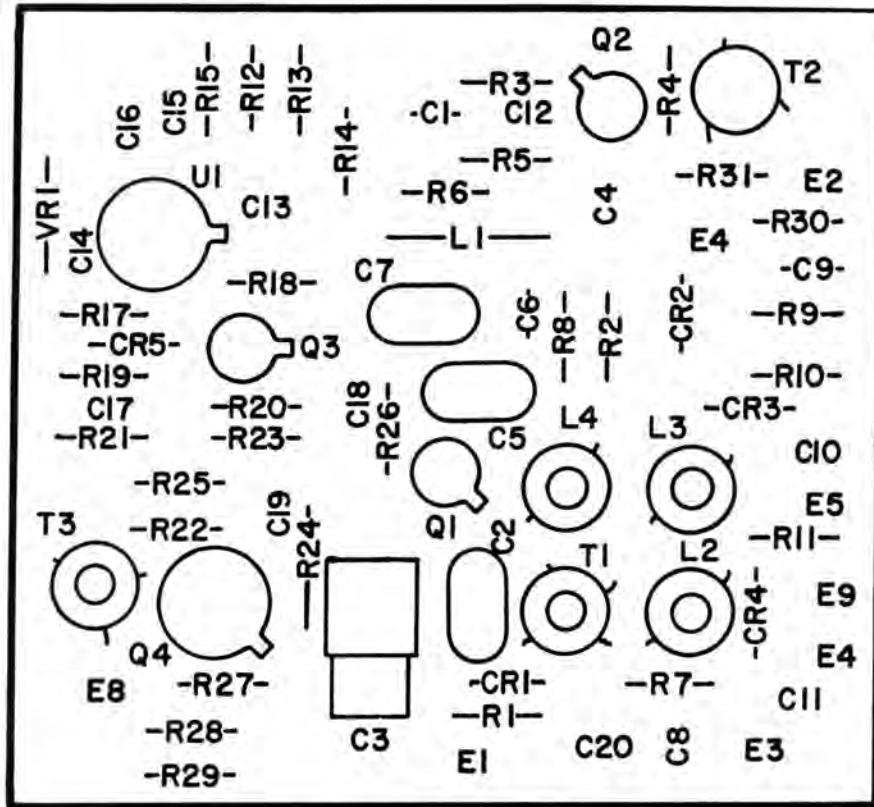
Type 796131 VCO P.C. Assembly (A5A2A2A1), Location of Components
